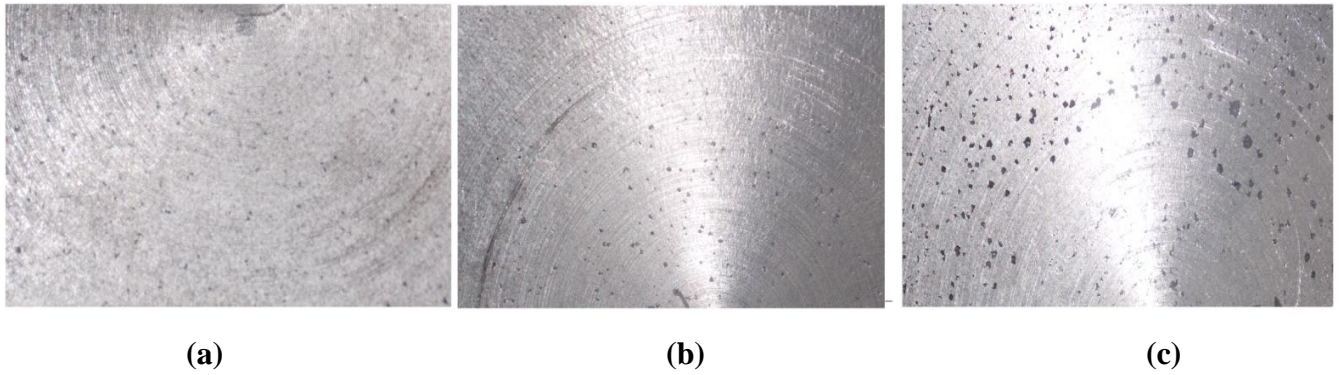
Work piece (a) Al-SiC, (b) Al- ($\text{Al}_2\text{O}_3+\text{Al}_3\text{Zr}$), (c) Al- ZrO_2
